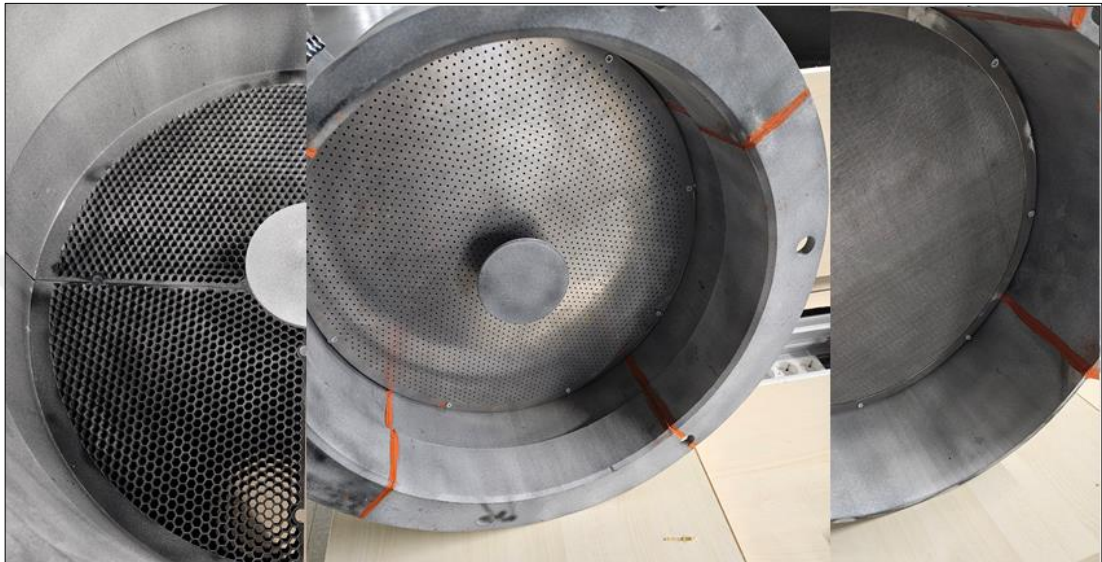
Assembly of the second shroud for “free disk” pumping tests.
